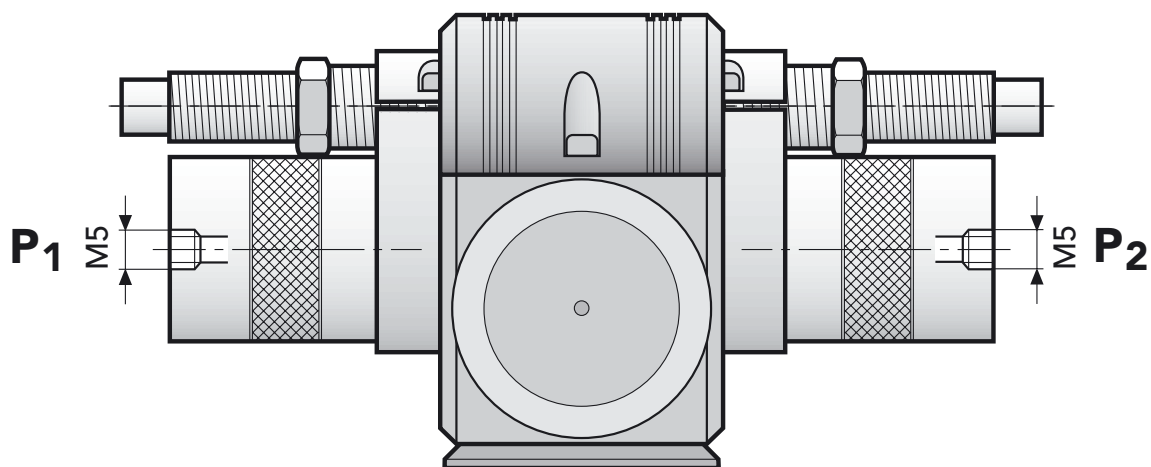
The gripper axis is perpendicular to the axis of rotation.
